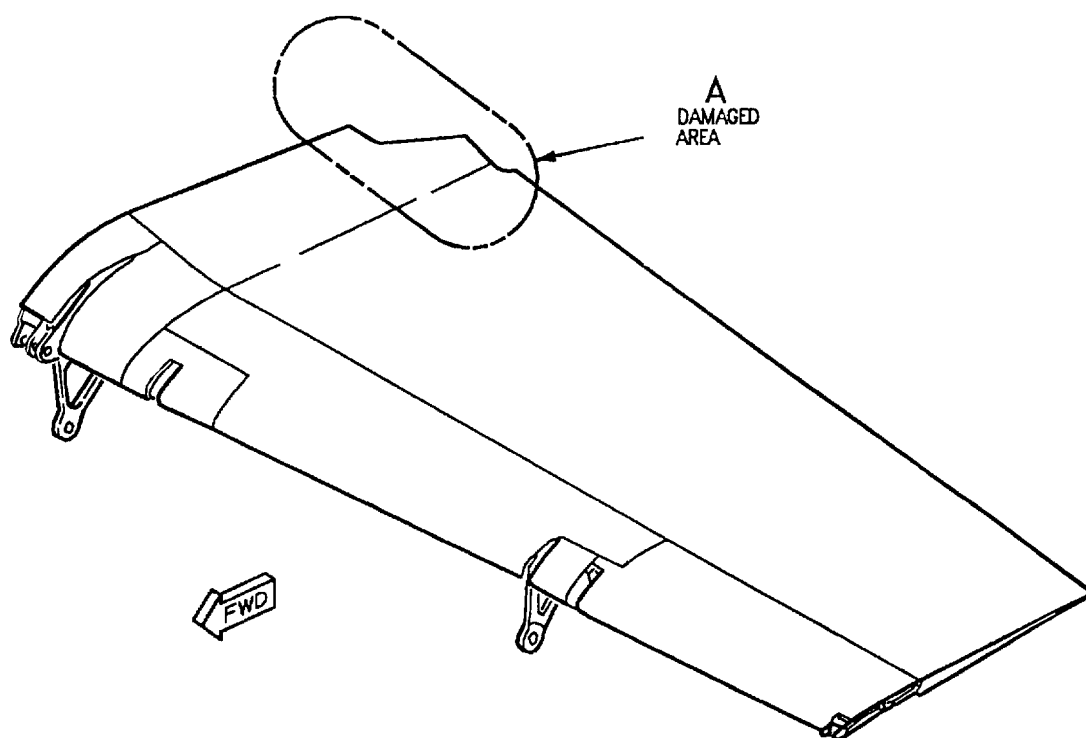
Inboard Aft Corner Repair (Sheet 1)
